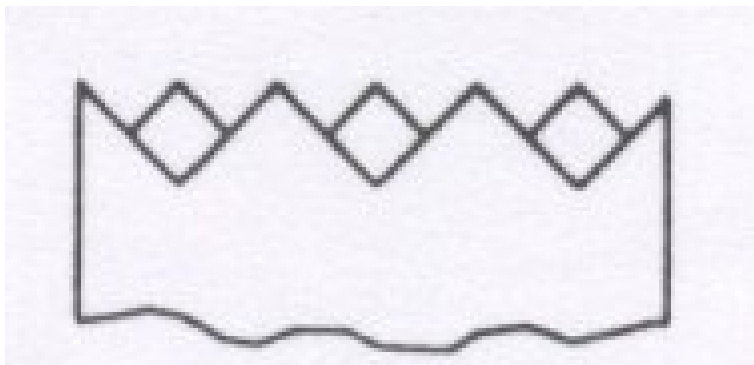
Position of cutting edges of diamond cut rotary burrs
